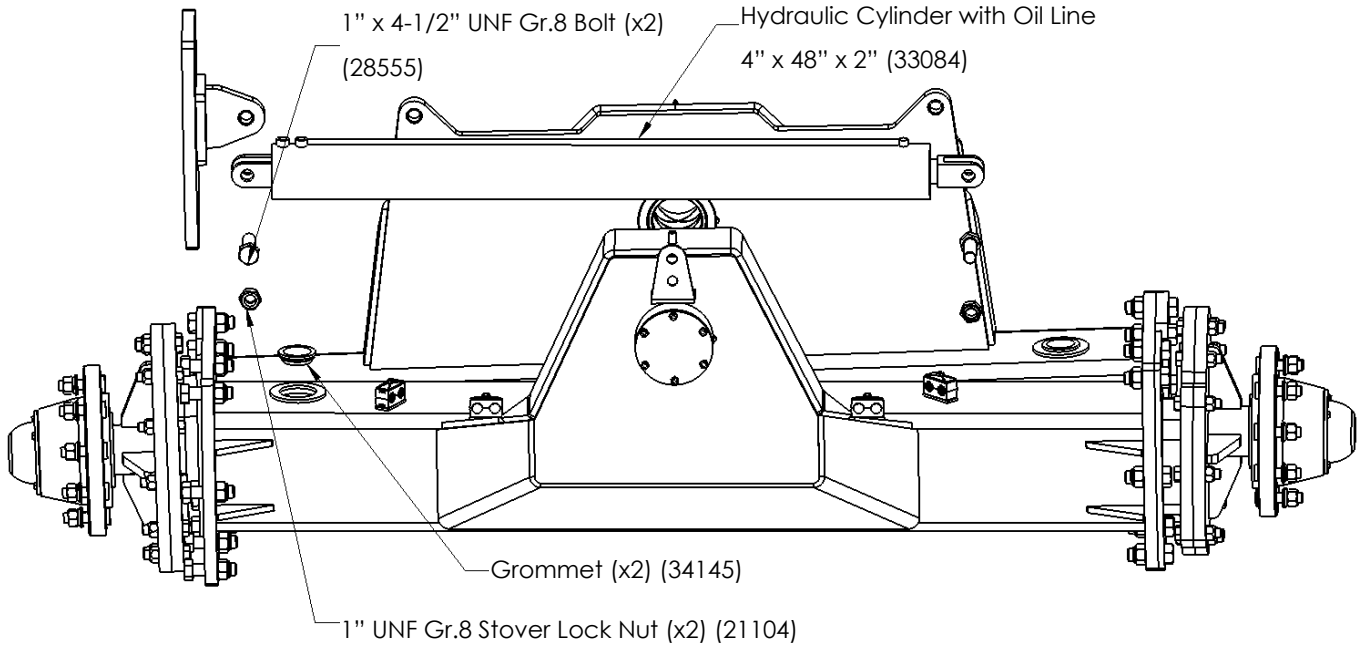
Telescoping Hydraulic Cylinder assembly
